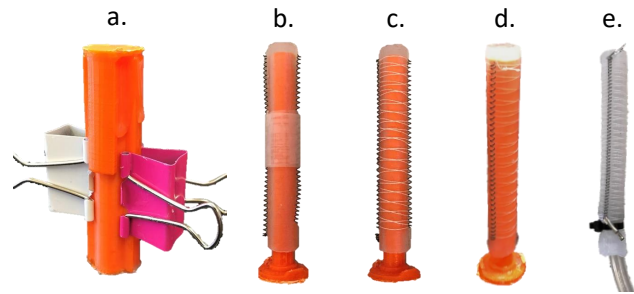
PneuSMA Actuator fabrication steps including (a) casting of silicone tube, (b) placement of pre-stretched Nitinol coils, (c) wrapping of the radial fibers around SMA springs, (d) thin coating of silicone over fibers, and (e) completed actuator.
